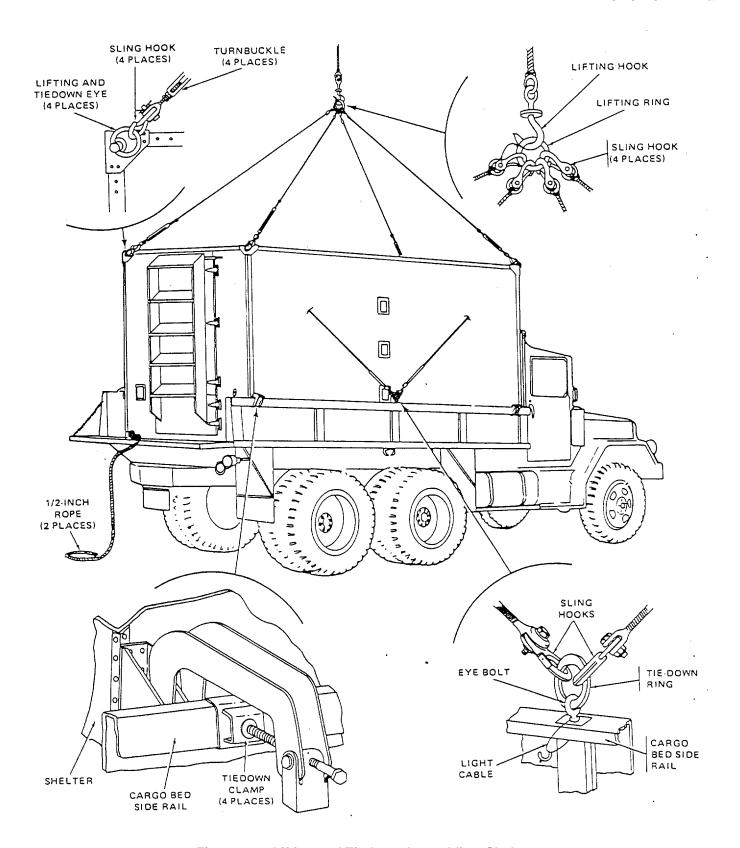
Lifting and Tiedown Assemblies, Shelter
